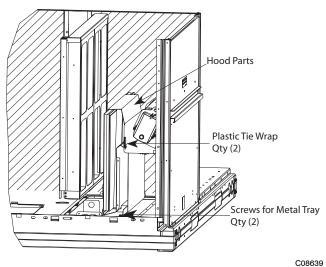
Economizer and Two-Position Damper Hood Parts Location
